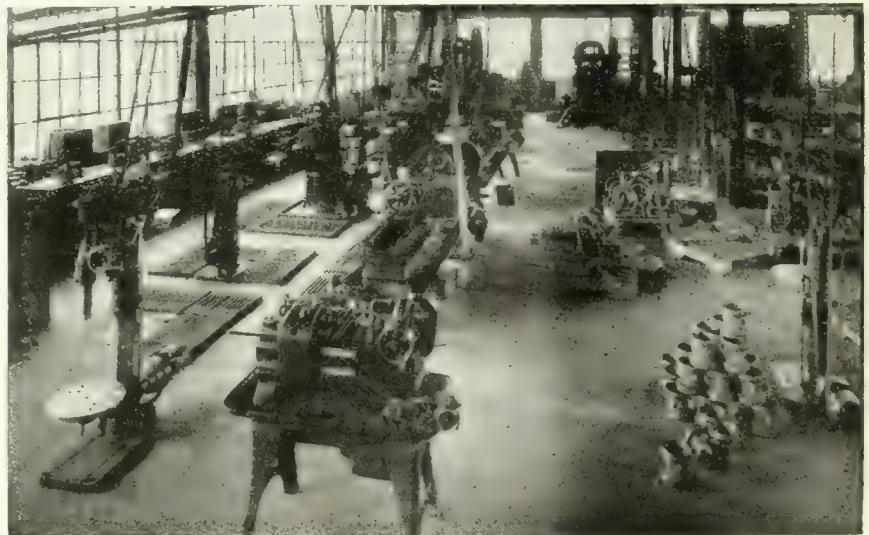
TOOL ROOM SHOWING SPACIOUS LOCATION OF MACHINES.
